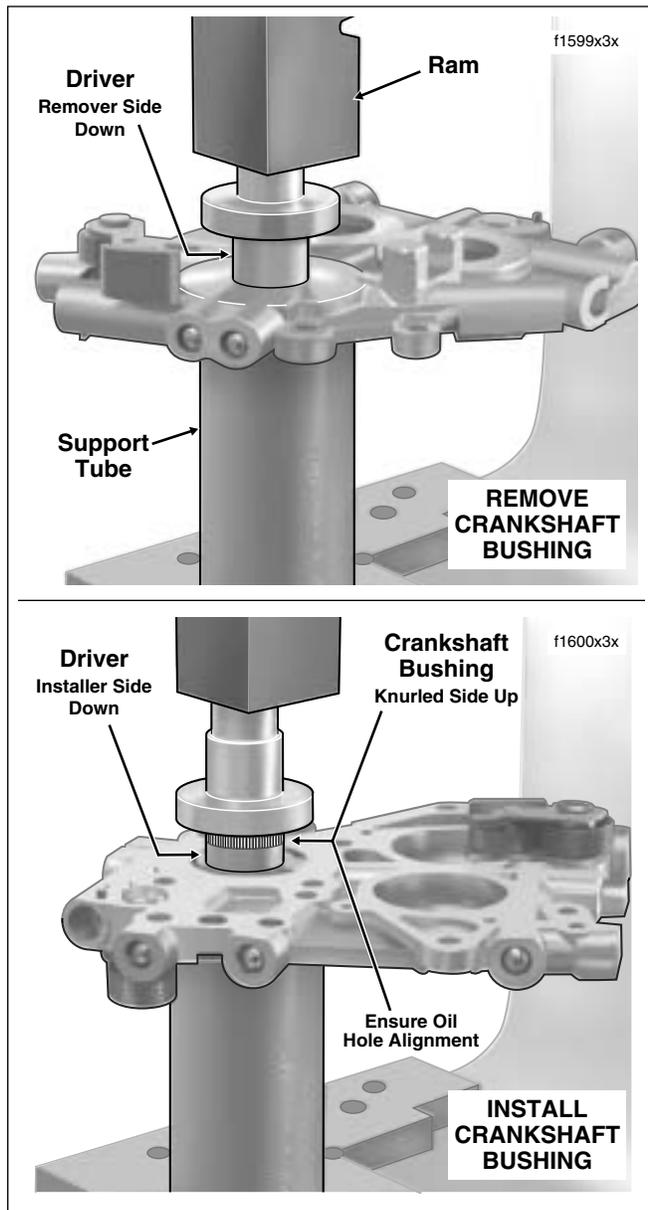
Remove/Install Crankshaft Bushing in Cam Support Plate
